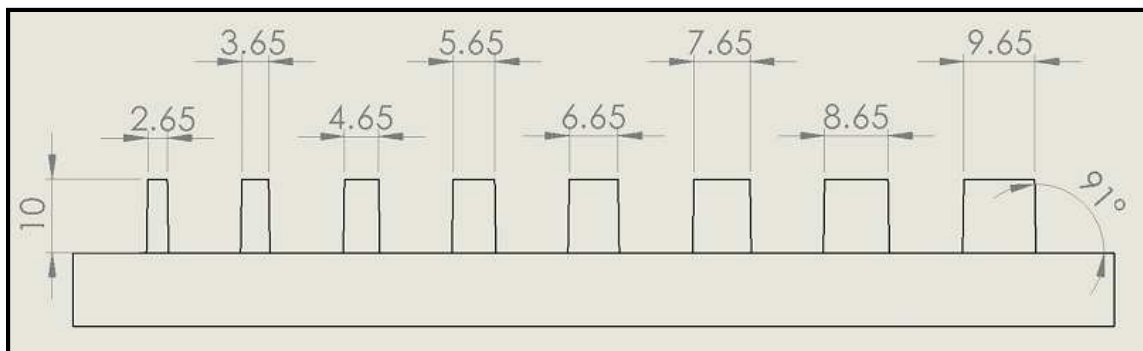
Test geometry 2: 2-D CAD drawing – with dimensions
